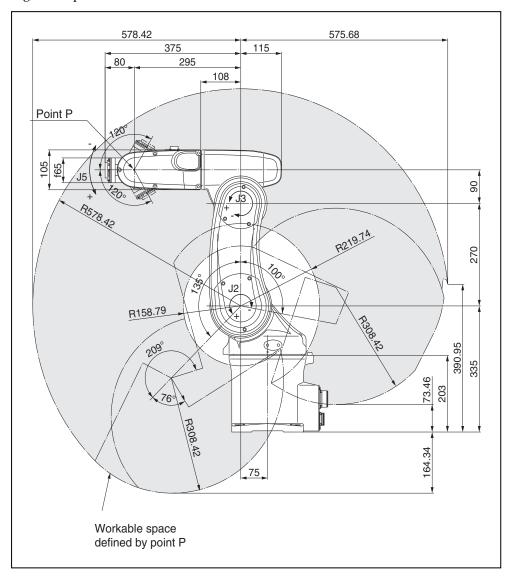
Viper 650 Robot Side View Dimensions (units in mm)
